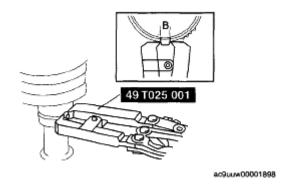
Crimping Wheel Boot Band Courtesy of MAZDA MOTORS CORP.
